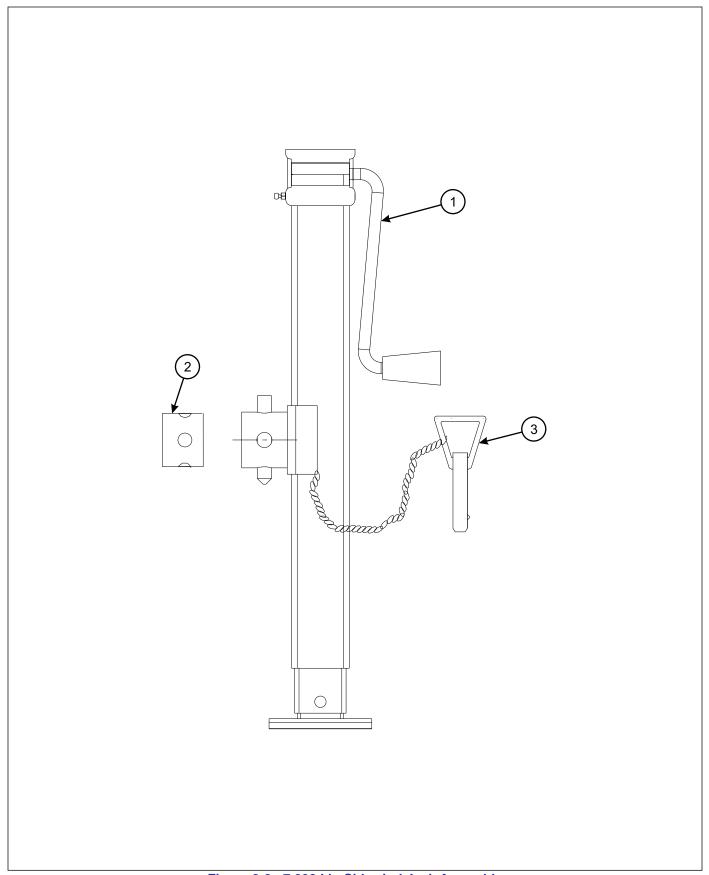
7,000 Lb. Sidewind Jack Assembly
